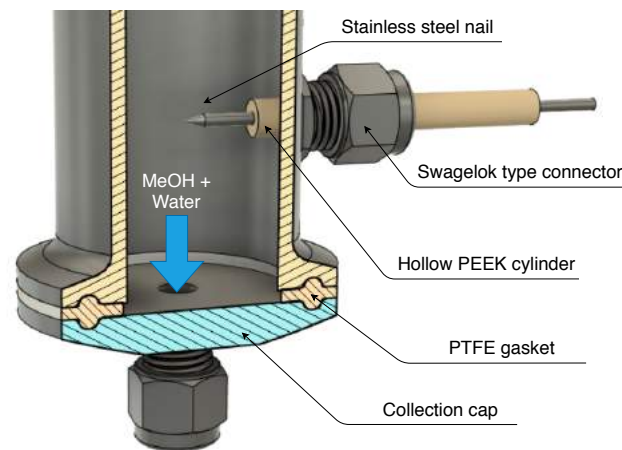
Section view of the level sensor assembly used in the reactor.
